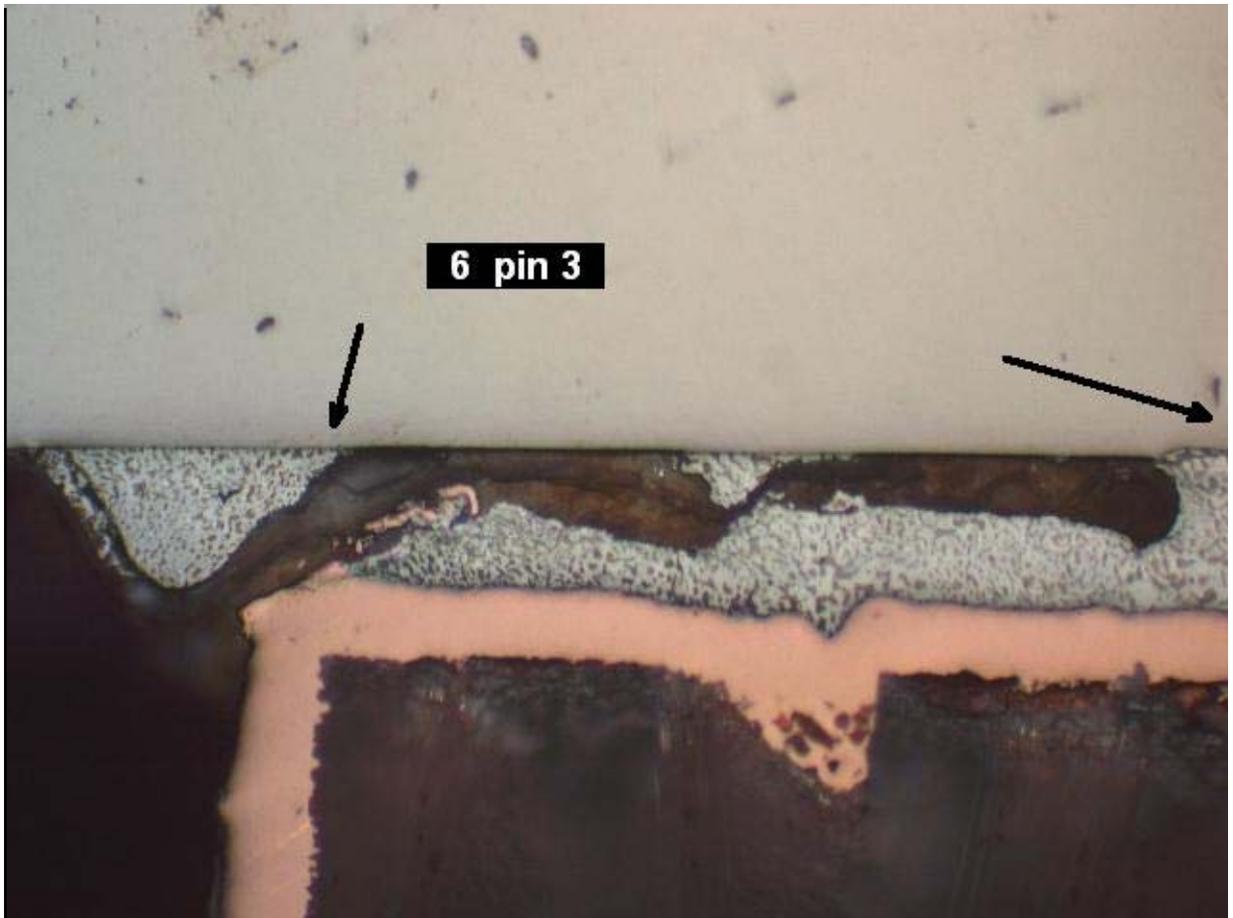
Higher magnification image showing gap and solder crack at the top of the hole. This crack extends over 1/2 the depth of the PCB hole. Image 9 shows a fine crack extending beyond the large gap. While some solder is cracked around the top of the hole the gaps may also include solder voids.
